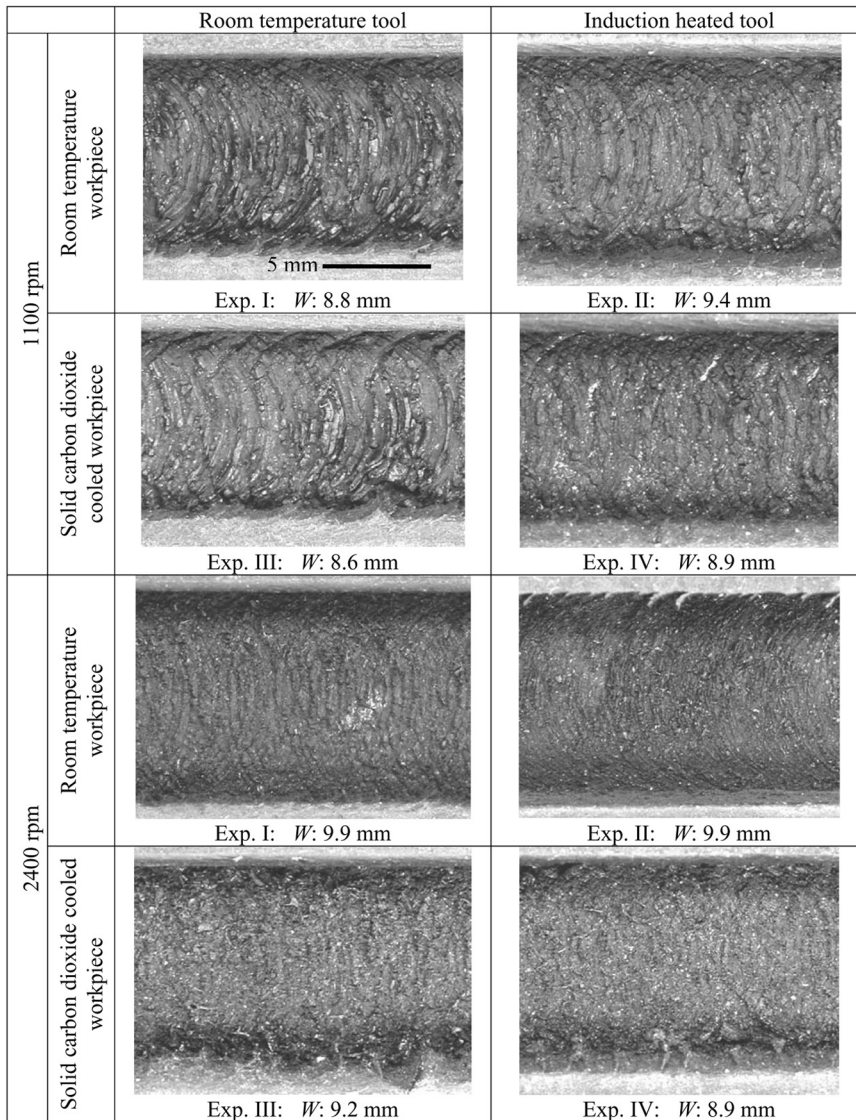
Optical pictures of machined surface. (W is the groove width).
